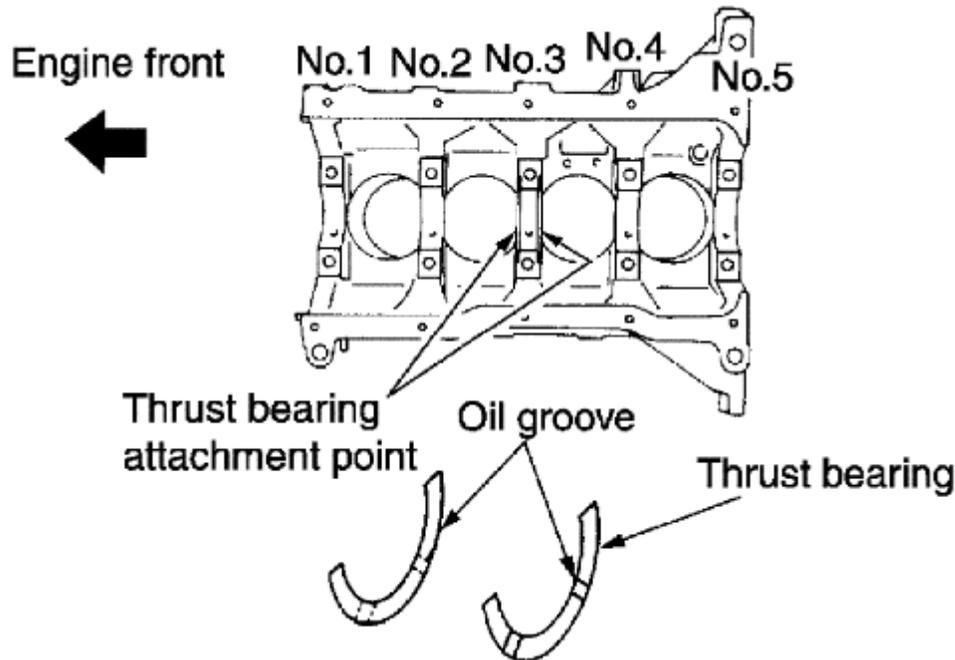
Identifying Thrust Bearing, Thrust Bearing Attachment Point And Oil Groove
